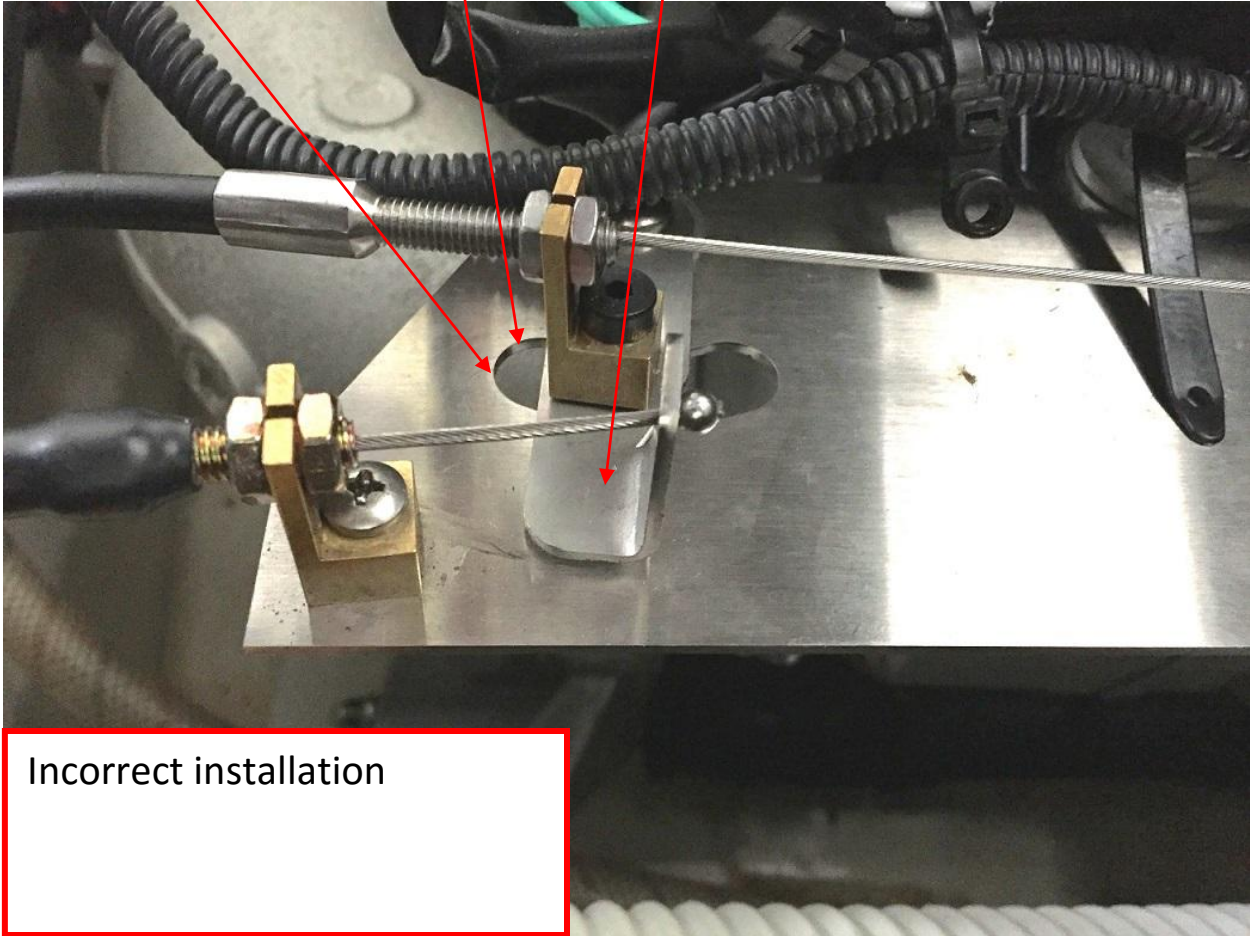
(Mechanical Throttle - Pivot arm out of position)
